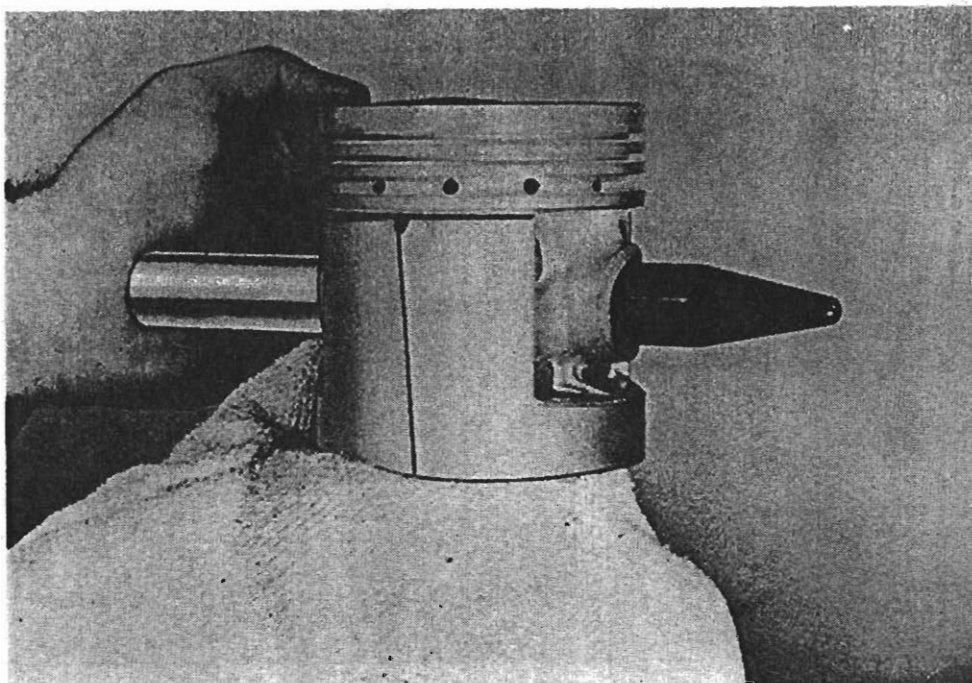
Place the Piston Pin on the Assembly Pilot and Push into Place as Shown.
